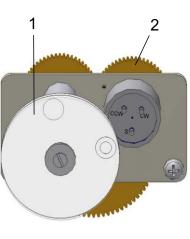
1...mechanical position indicator, 2...wheel turning the potentiometer
